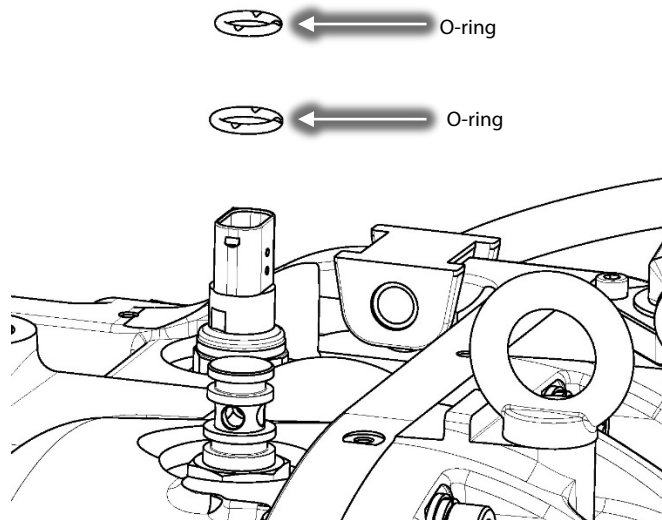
SCR Manifold Return Brass Fitting O-ring Install
